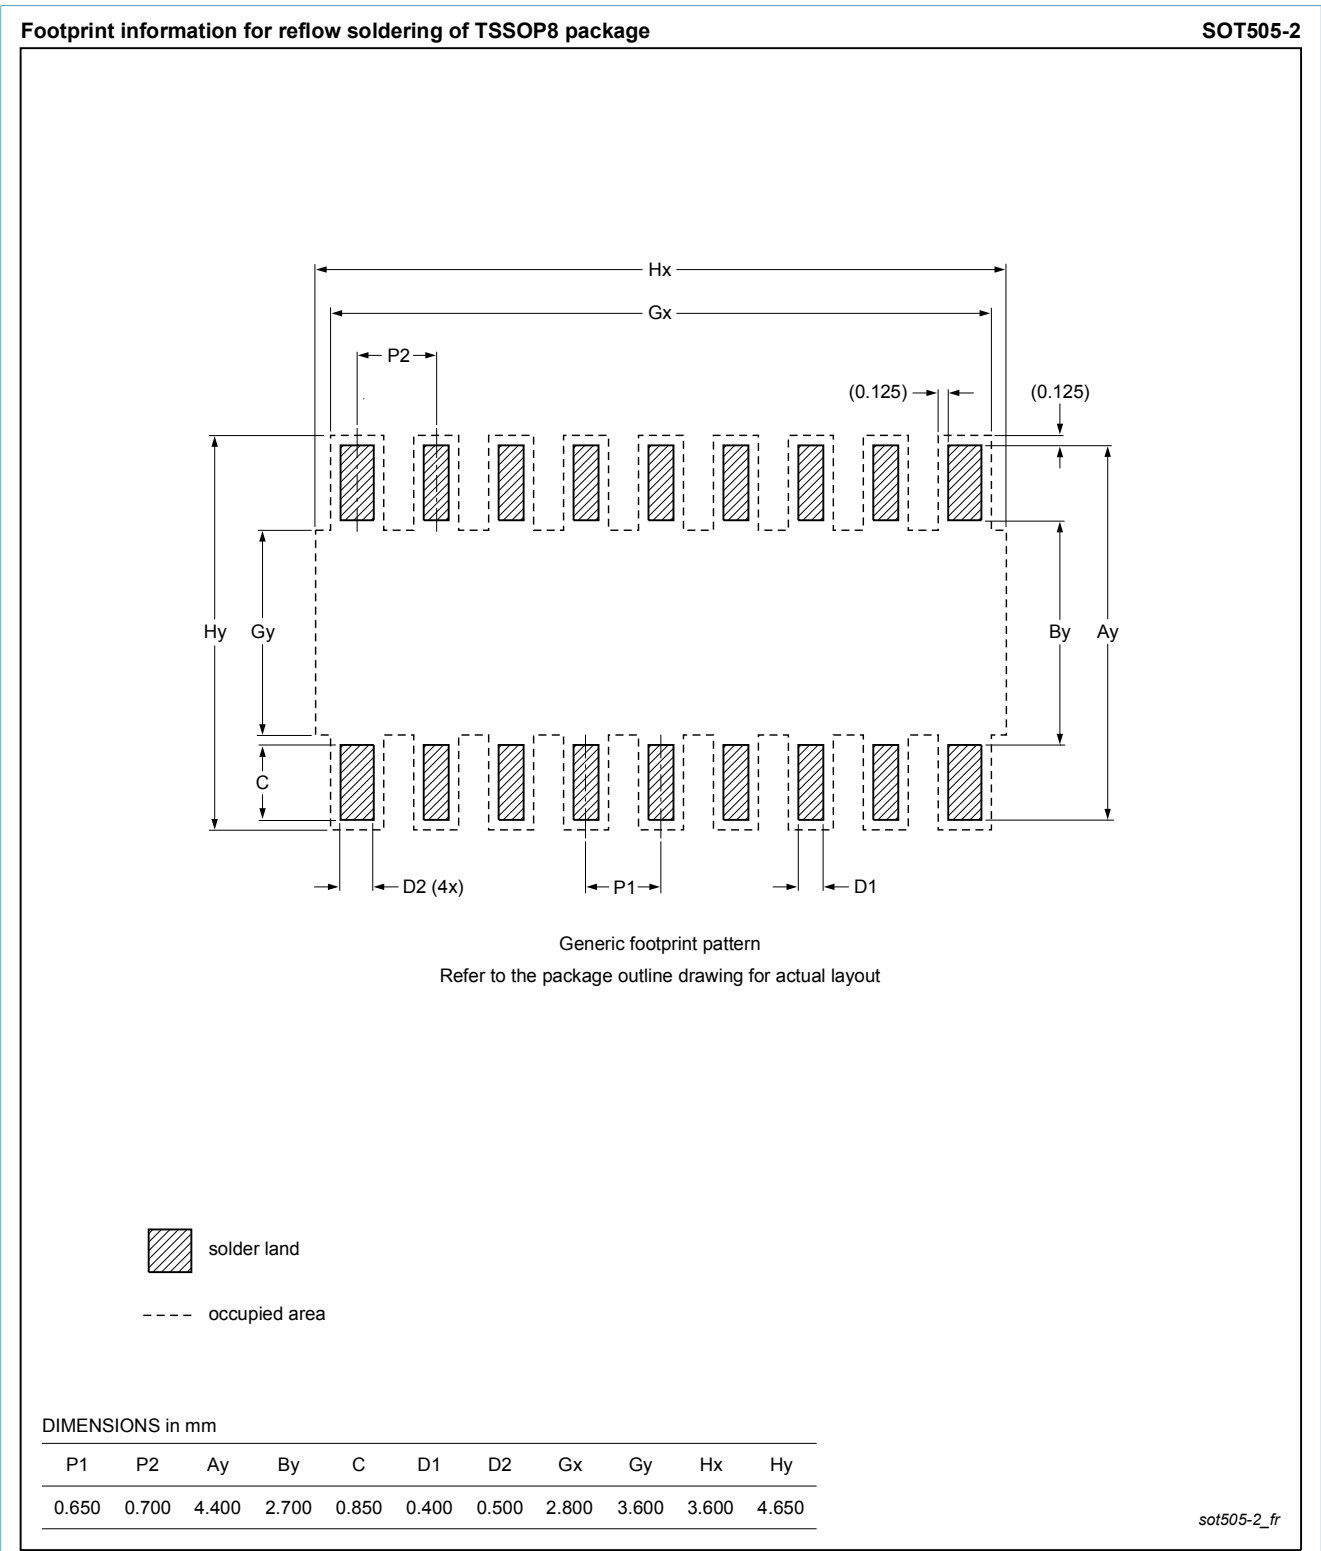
Reflow soldering footprint for TSSOP8 (SOT505-2)
